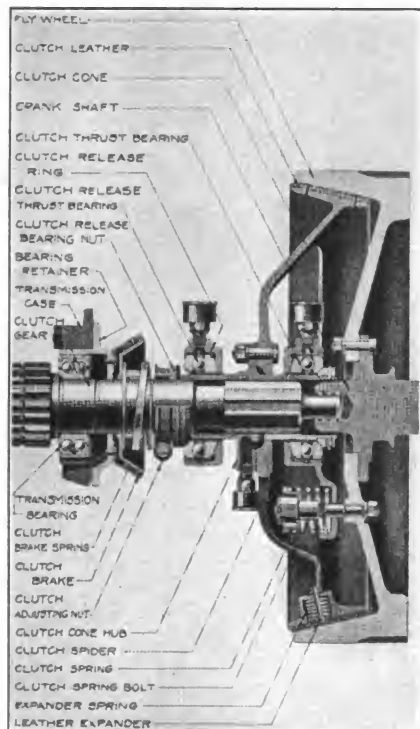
SECTIONAL VIEW OF BUICK CONE CLUTCH
